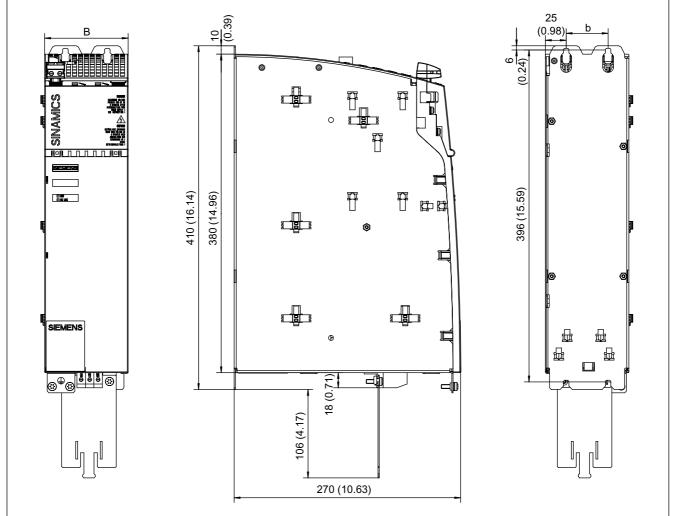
Dimension drawing of Active Line Module with internal air cooling (16 kW)
